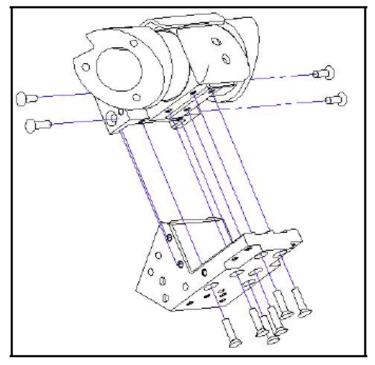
Details for assembling pelvis base module to pelvic box assembly
